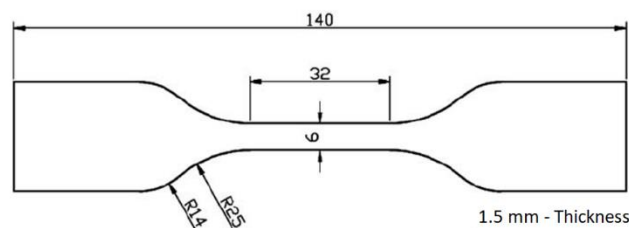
Tensile testing specimen dimensions, with grip length 30 mm and the specimen width 25 mm.
